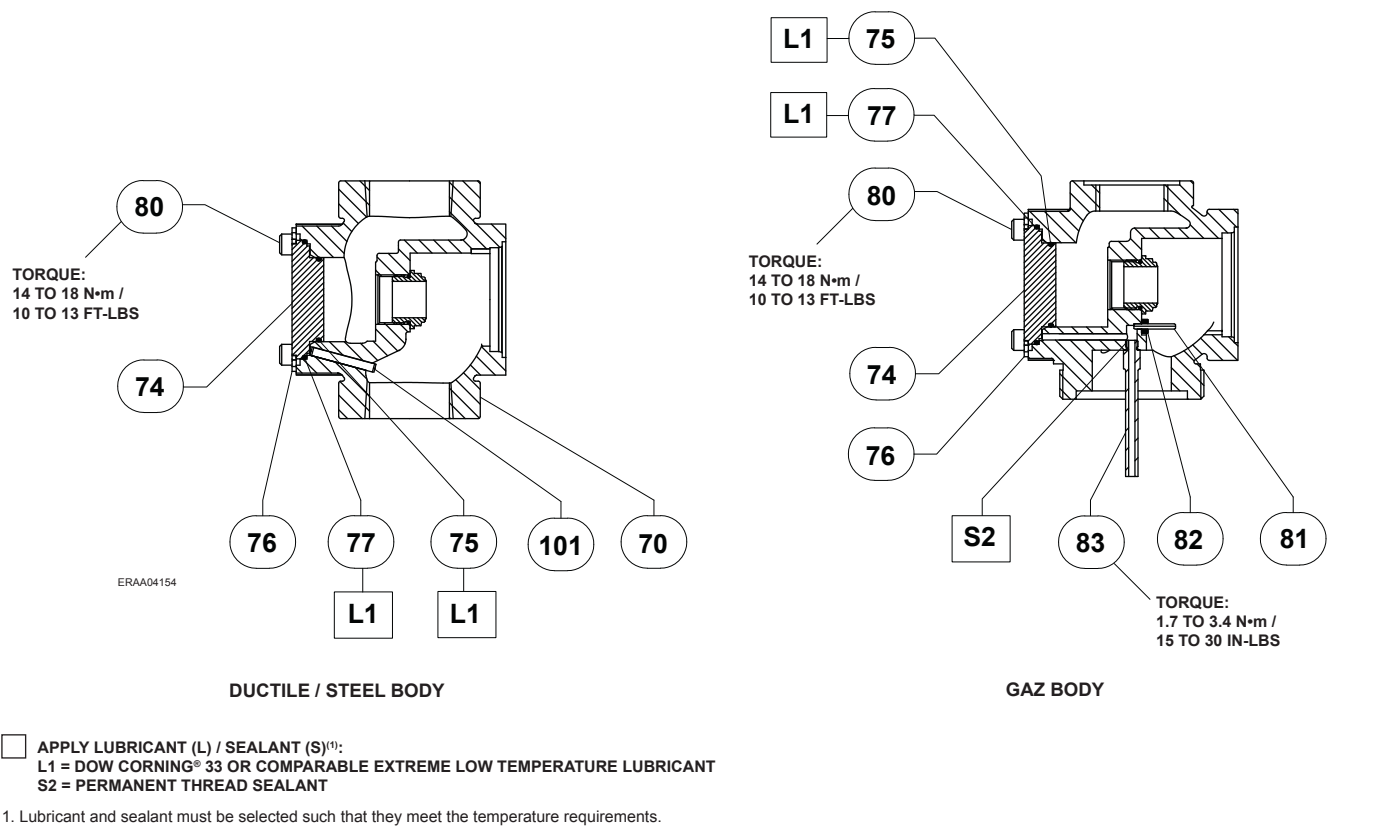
Standard Body Assembly and Rp 1 x 2-1/4 GAZ Body Assembly
